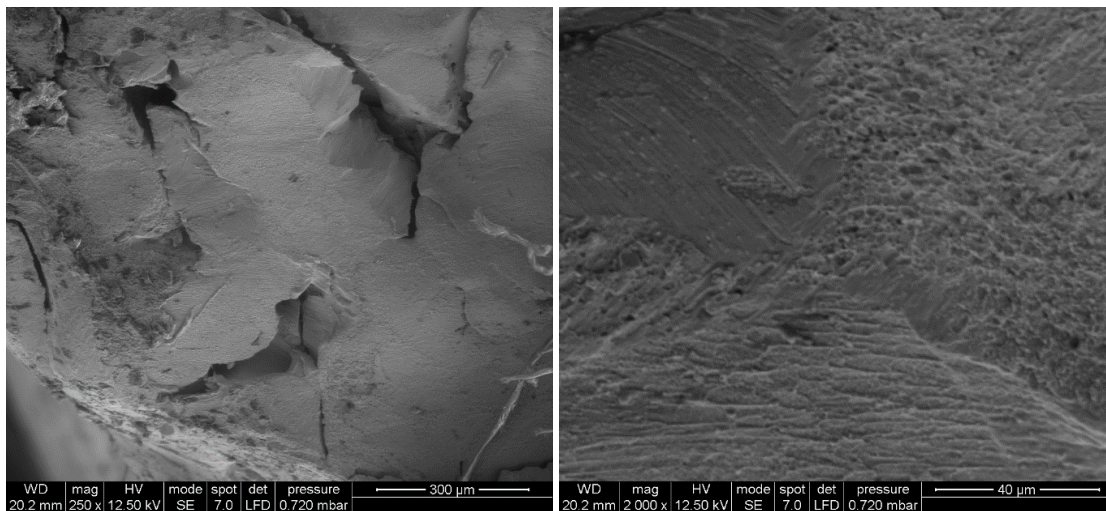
HS6-5-2 penetrator fractured in a perforating shot; increasing magnification
